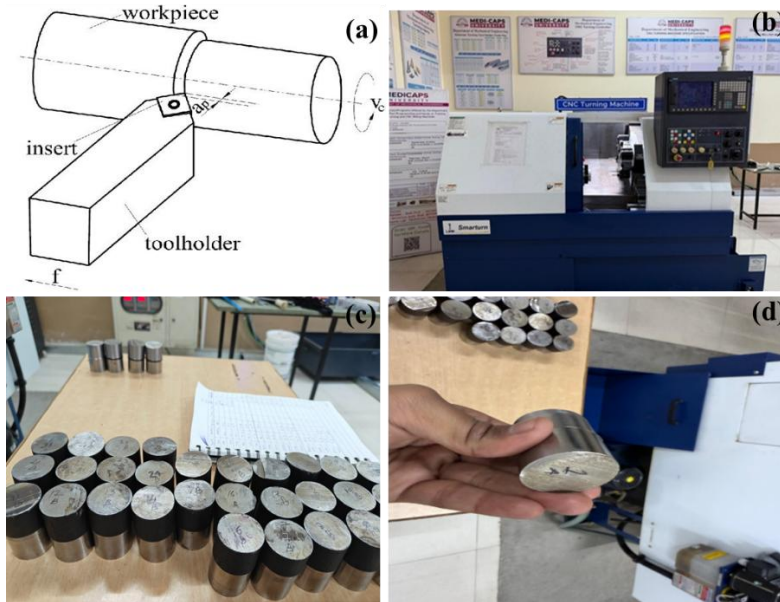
(a) Turning Process (b) CNC Machine(c) Work Piece Samples (d) Work Piece Inspection
